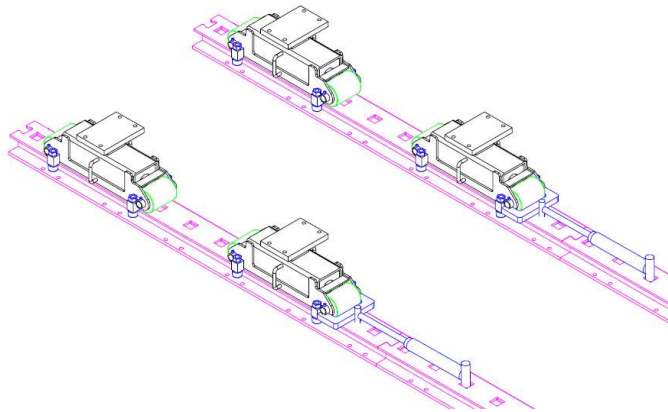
Modular Guide Rails (shown with RR30 rollers and pivot bearings)
